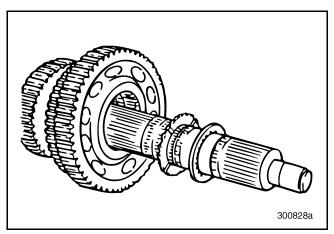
Removing Internal-Toothed and External-Toothed Thrust Washers (T313L/T318L Shown)
